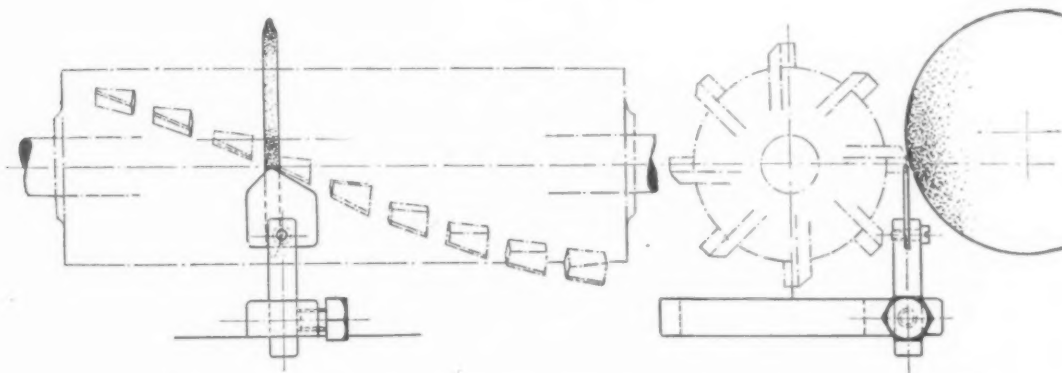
RELIEVING AND SHARPENING TEETH OF FRANCIS MILLING CUTTER
